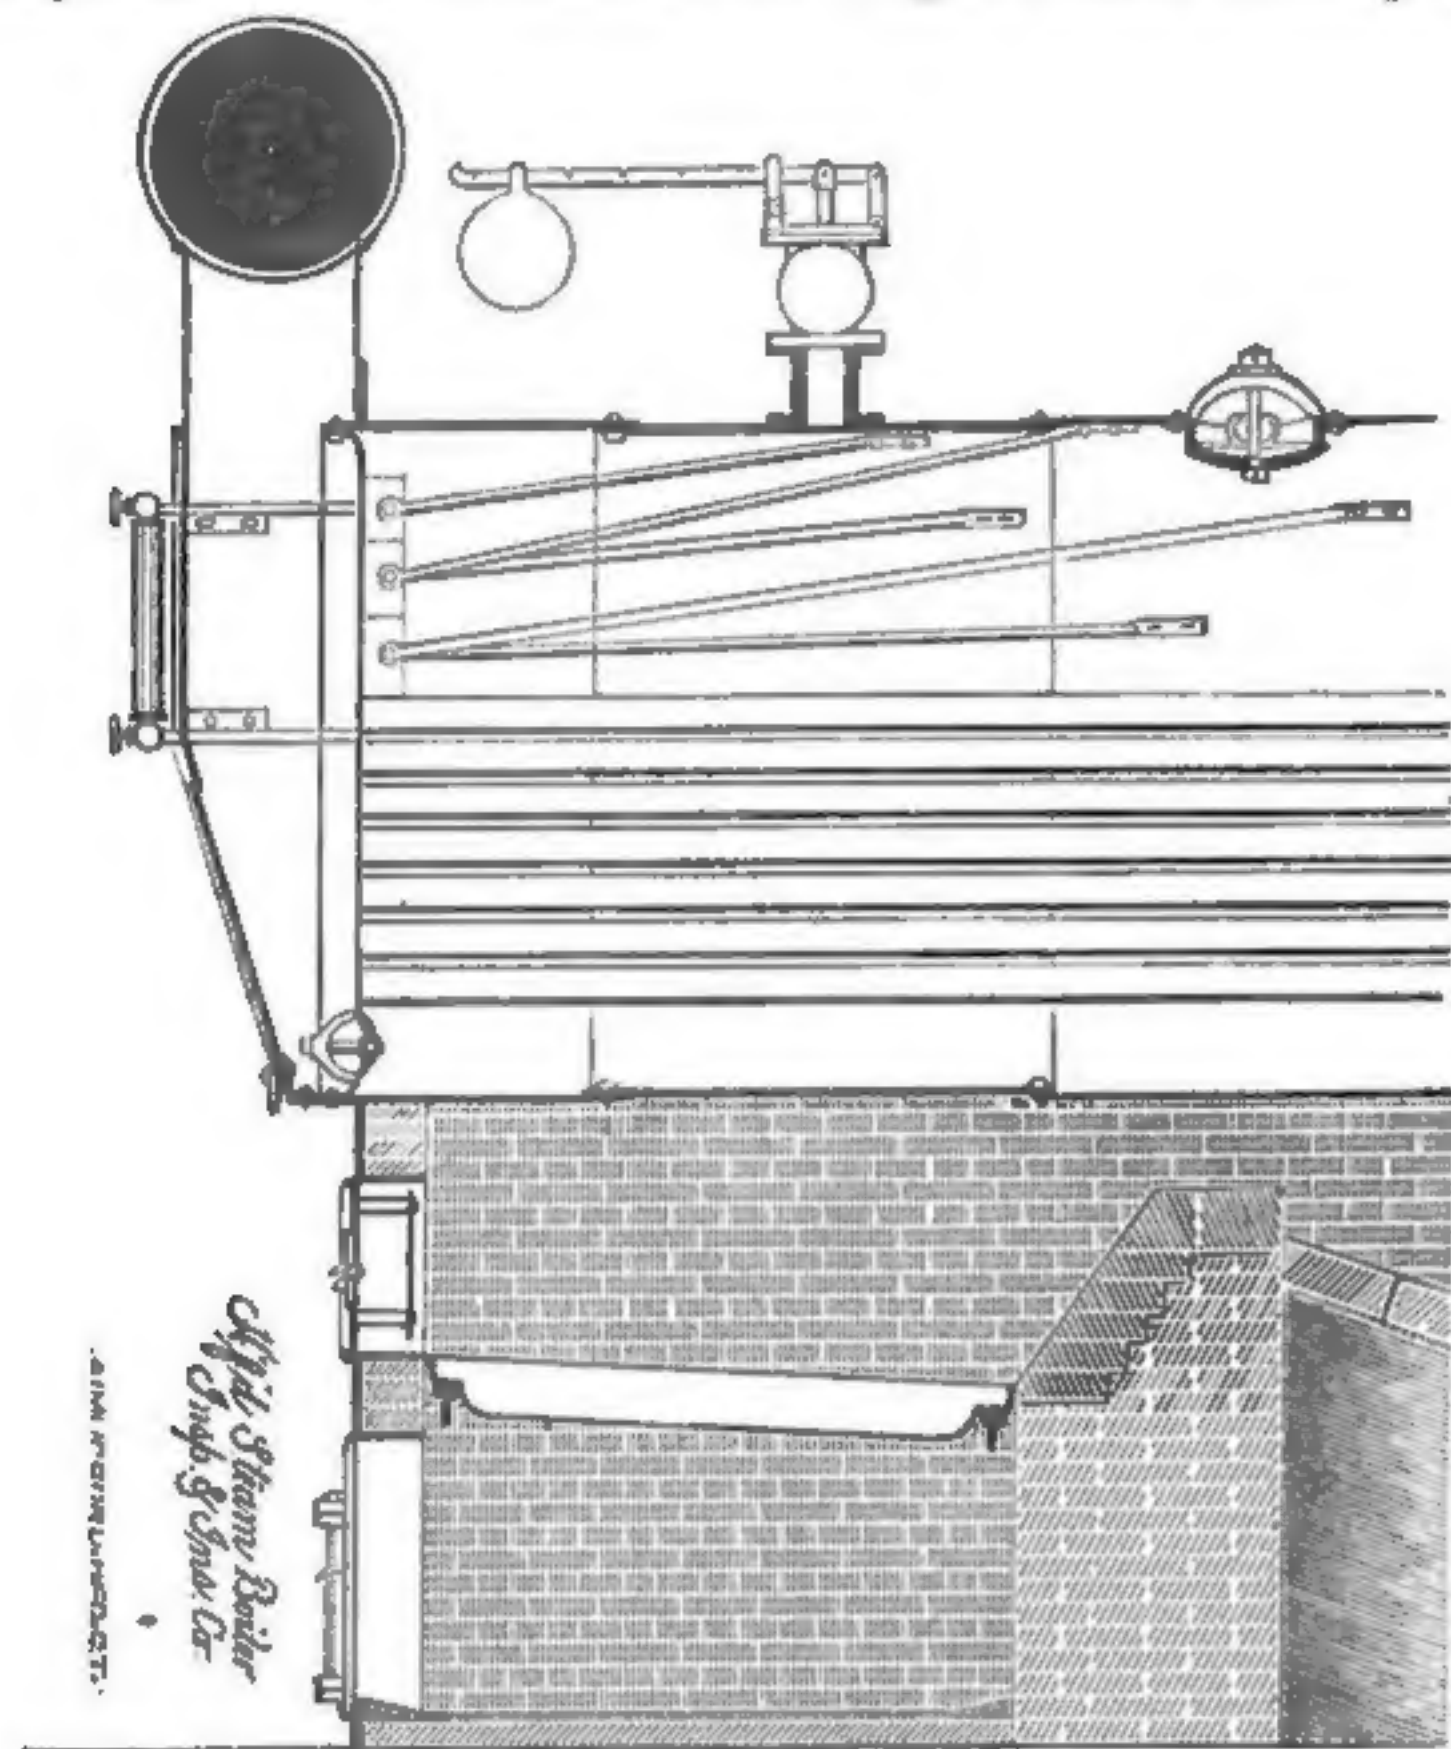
SECTIONAL VIEW OF A CUT-AWAY FRONT.
